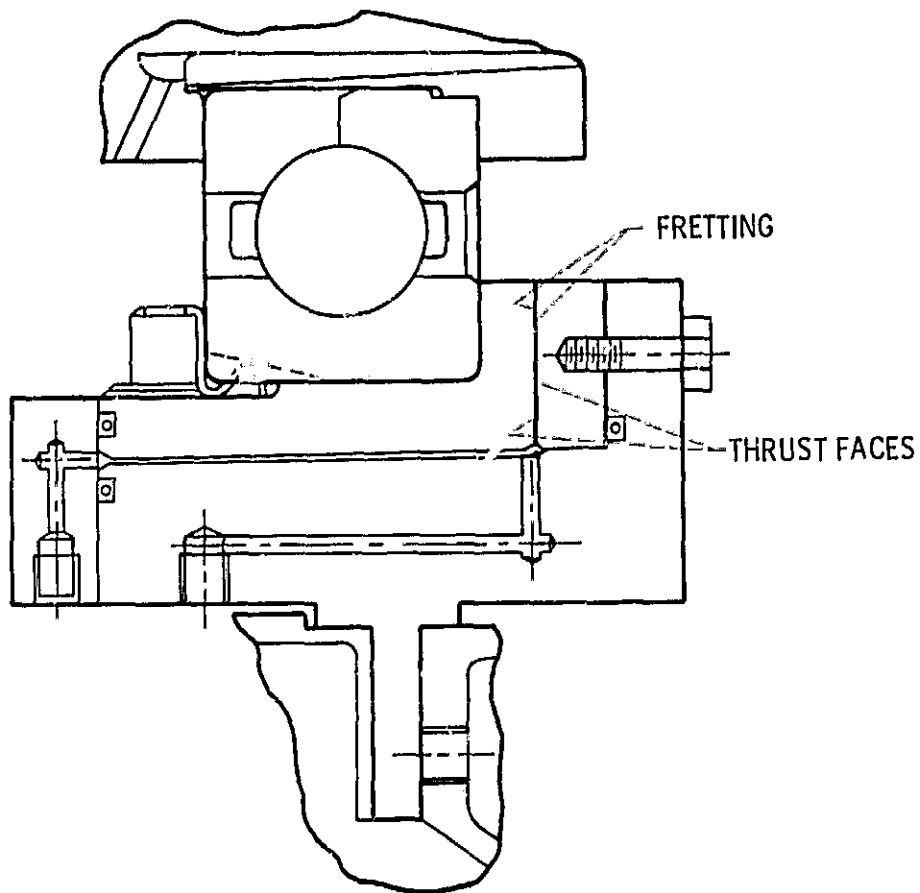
Fretting of the thrust faces on a damped bearing assembly.
